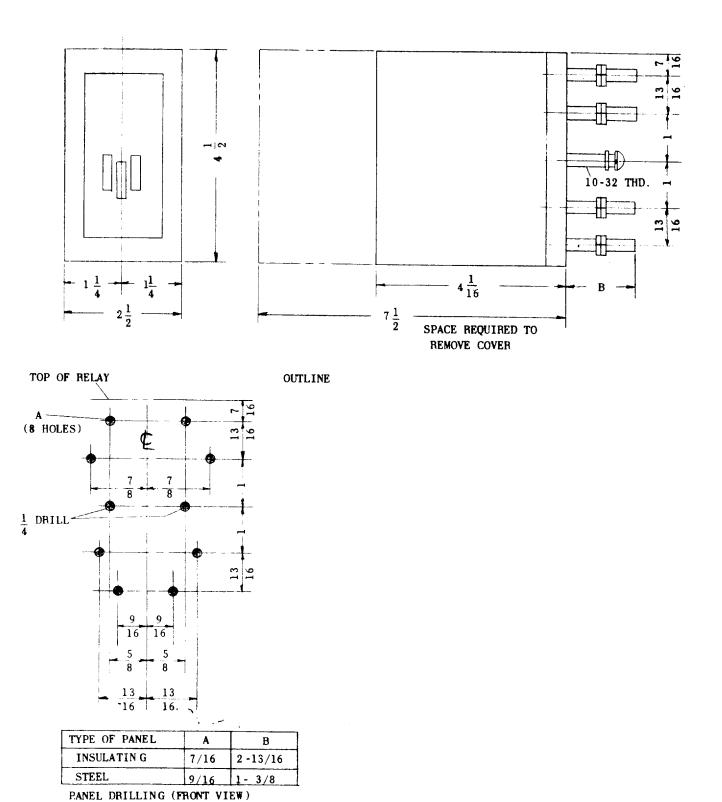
(0148A3979-3) Outline And Panel Drilling Dimensions For The Projection Mounted NGV15D Relay
